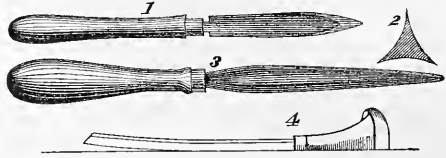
Steel Engraver's Tools. 1. Scraper. 2. Section of Scraper. 3. Burnisher. 4. Burin.
